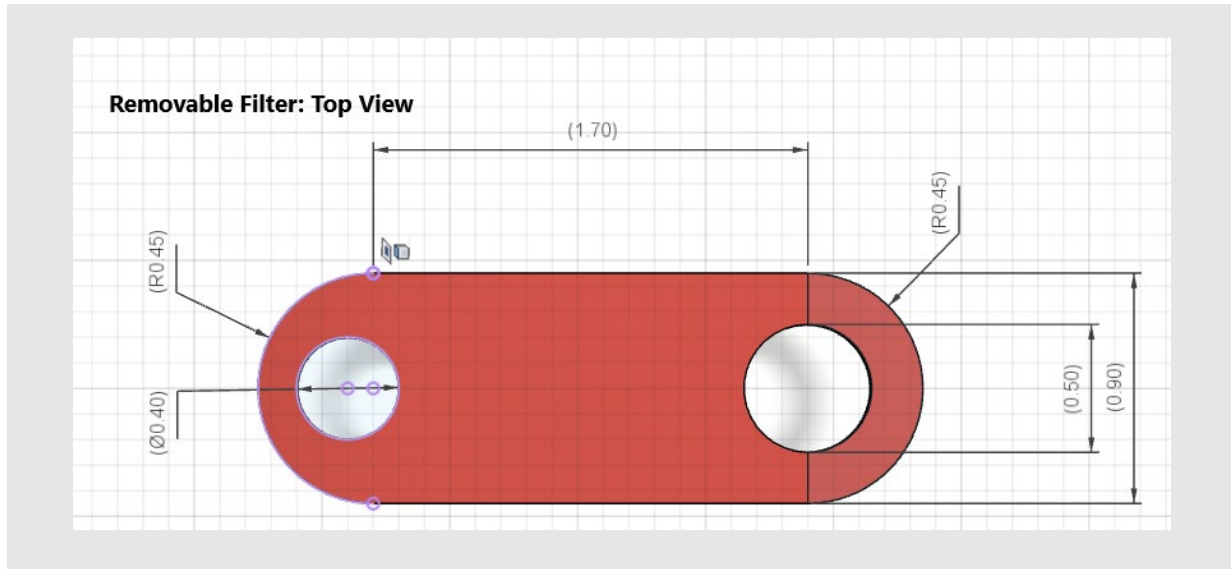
Dimensioned CAD drawing of the CDC's removable sediment filter.
